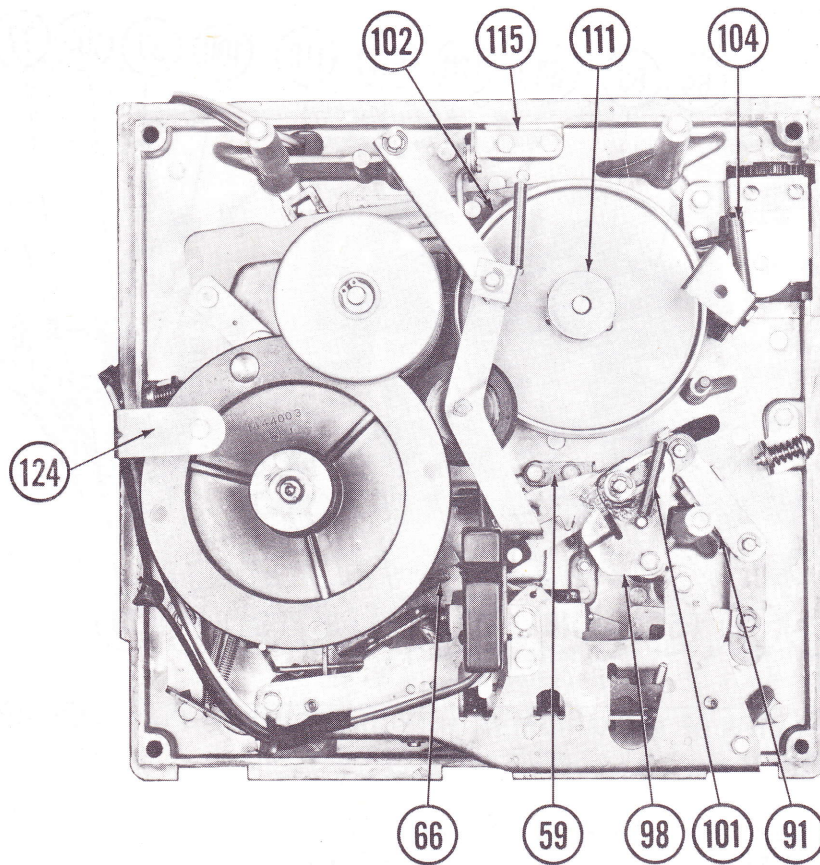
BOTTOM VIEW OF TAPE DECK WITH MOTOR MOUNTING PLATE REMOVED.
